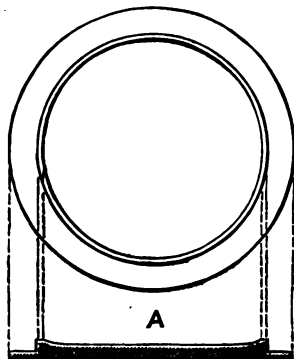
DISC WITH FLANGE, FORMING END OF BOILER.
